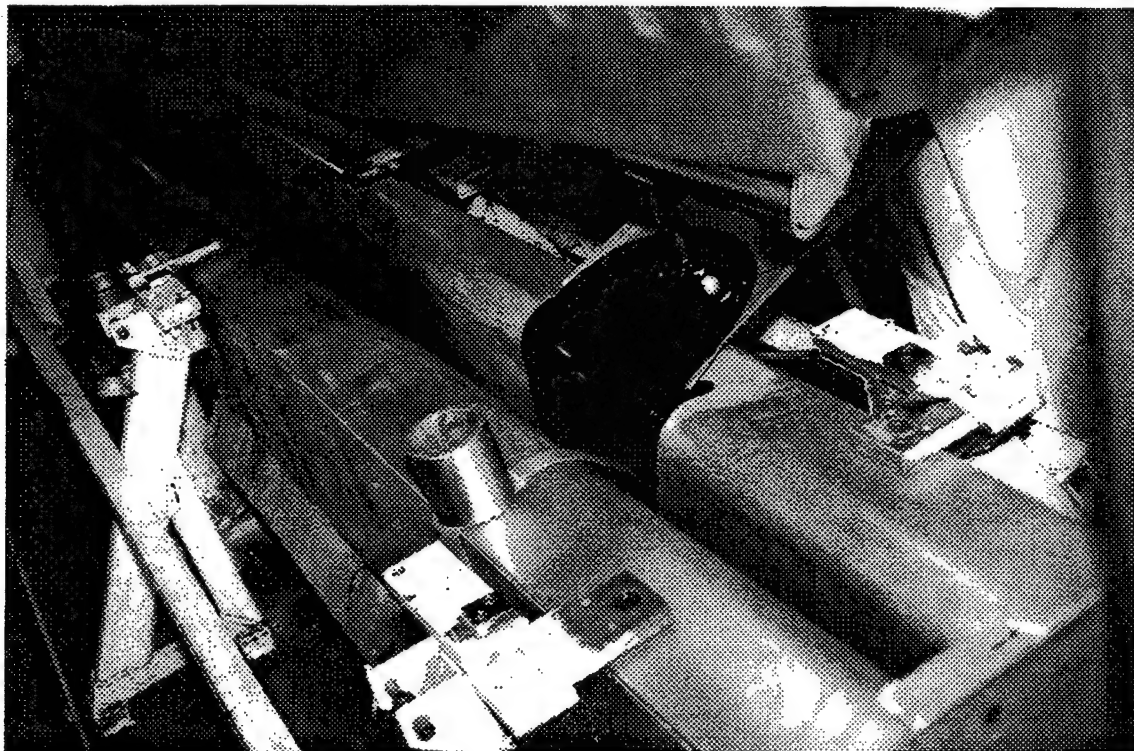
Casting 535330A into Tip End of Mold Cavity. Note Brass Shim at Station 246 Lower Surface.
